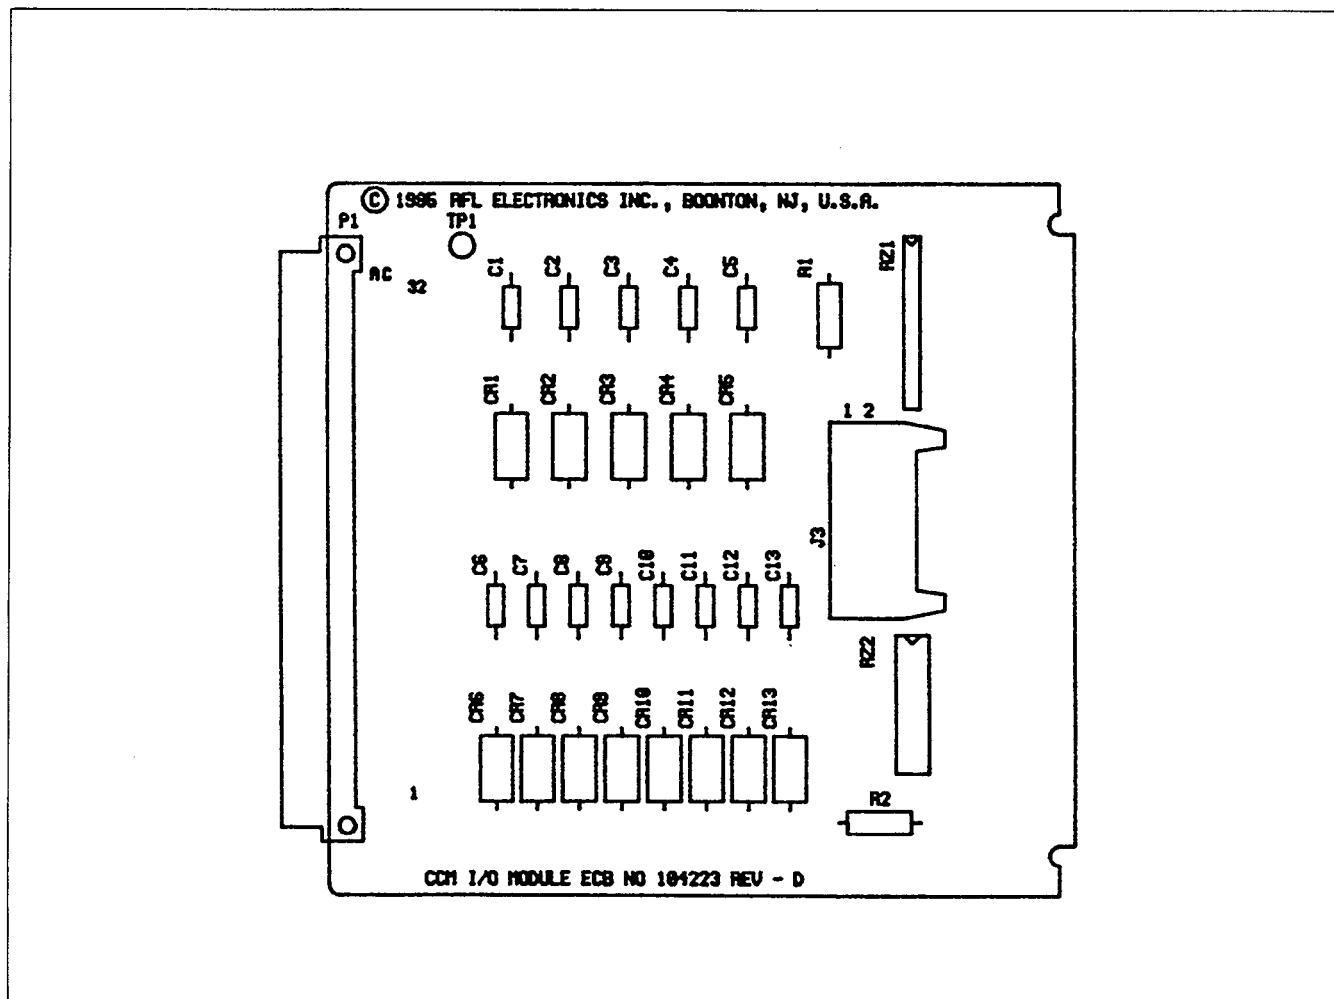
Component locator drawing, RFL 9720 CCM I/O Input/Output Module
